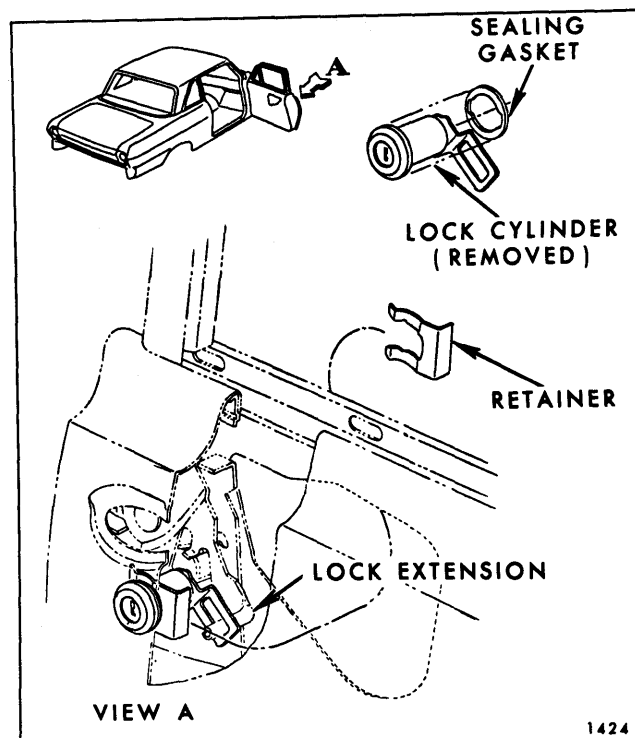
Front Door Lock Cylinder Removal - All Styles
